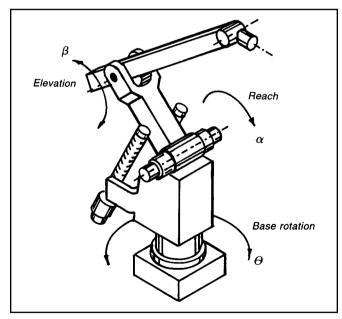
A low-shoulder, articulated, revolute, or jointed-geometry robot has a base or waist, an upper arm extending from the shoulder to the elbow, and a forearm extending from the elbow to the wrist. This robot can rotate at the waist, and both upper and lower arms can move independently through angles in the vertical plane. The angle of rotation is  $\theta$  (theta), the angle of elevation is  $\theta$  (beta), and the angle of forearm movement is  $\alpha$  (alpha).
